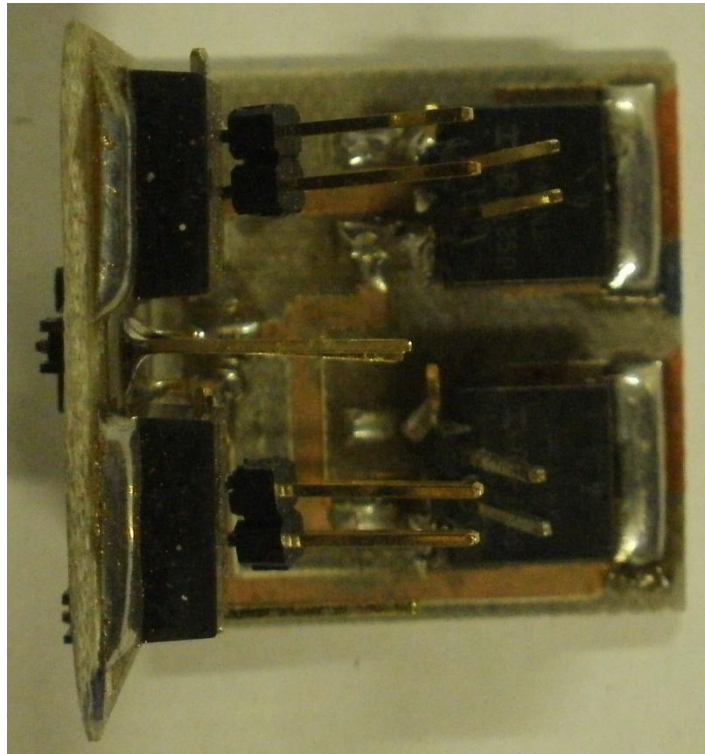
Device Under Test 3 PCB (3 Dimensional – Alternate View)
